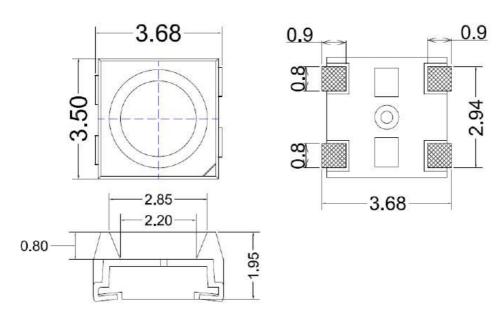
IN-PI33TBTPRPGPB Package Outline Dimensions
